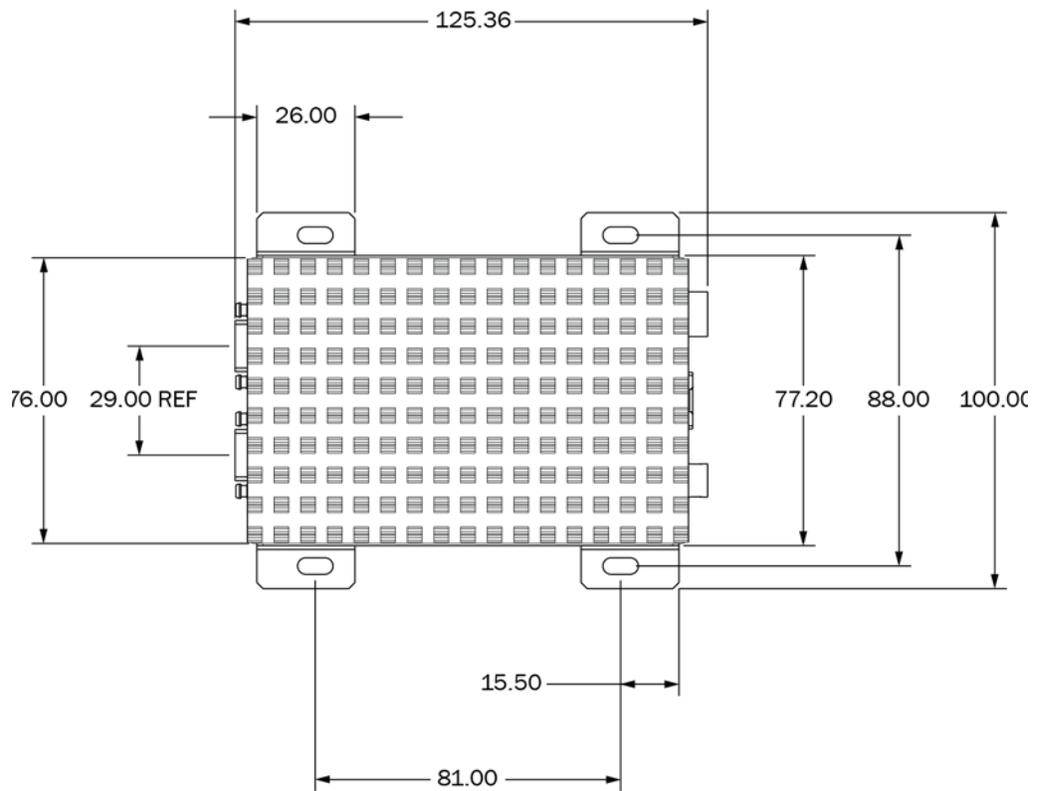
CL-Ten Dual Medium External Frame Grabber Enclosure - Side View
